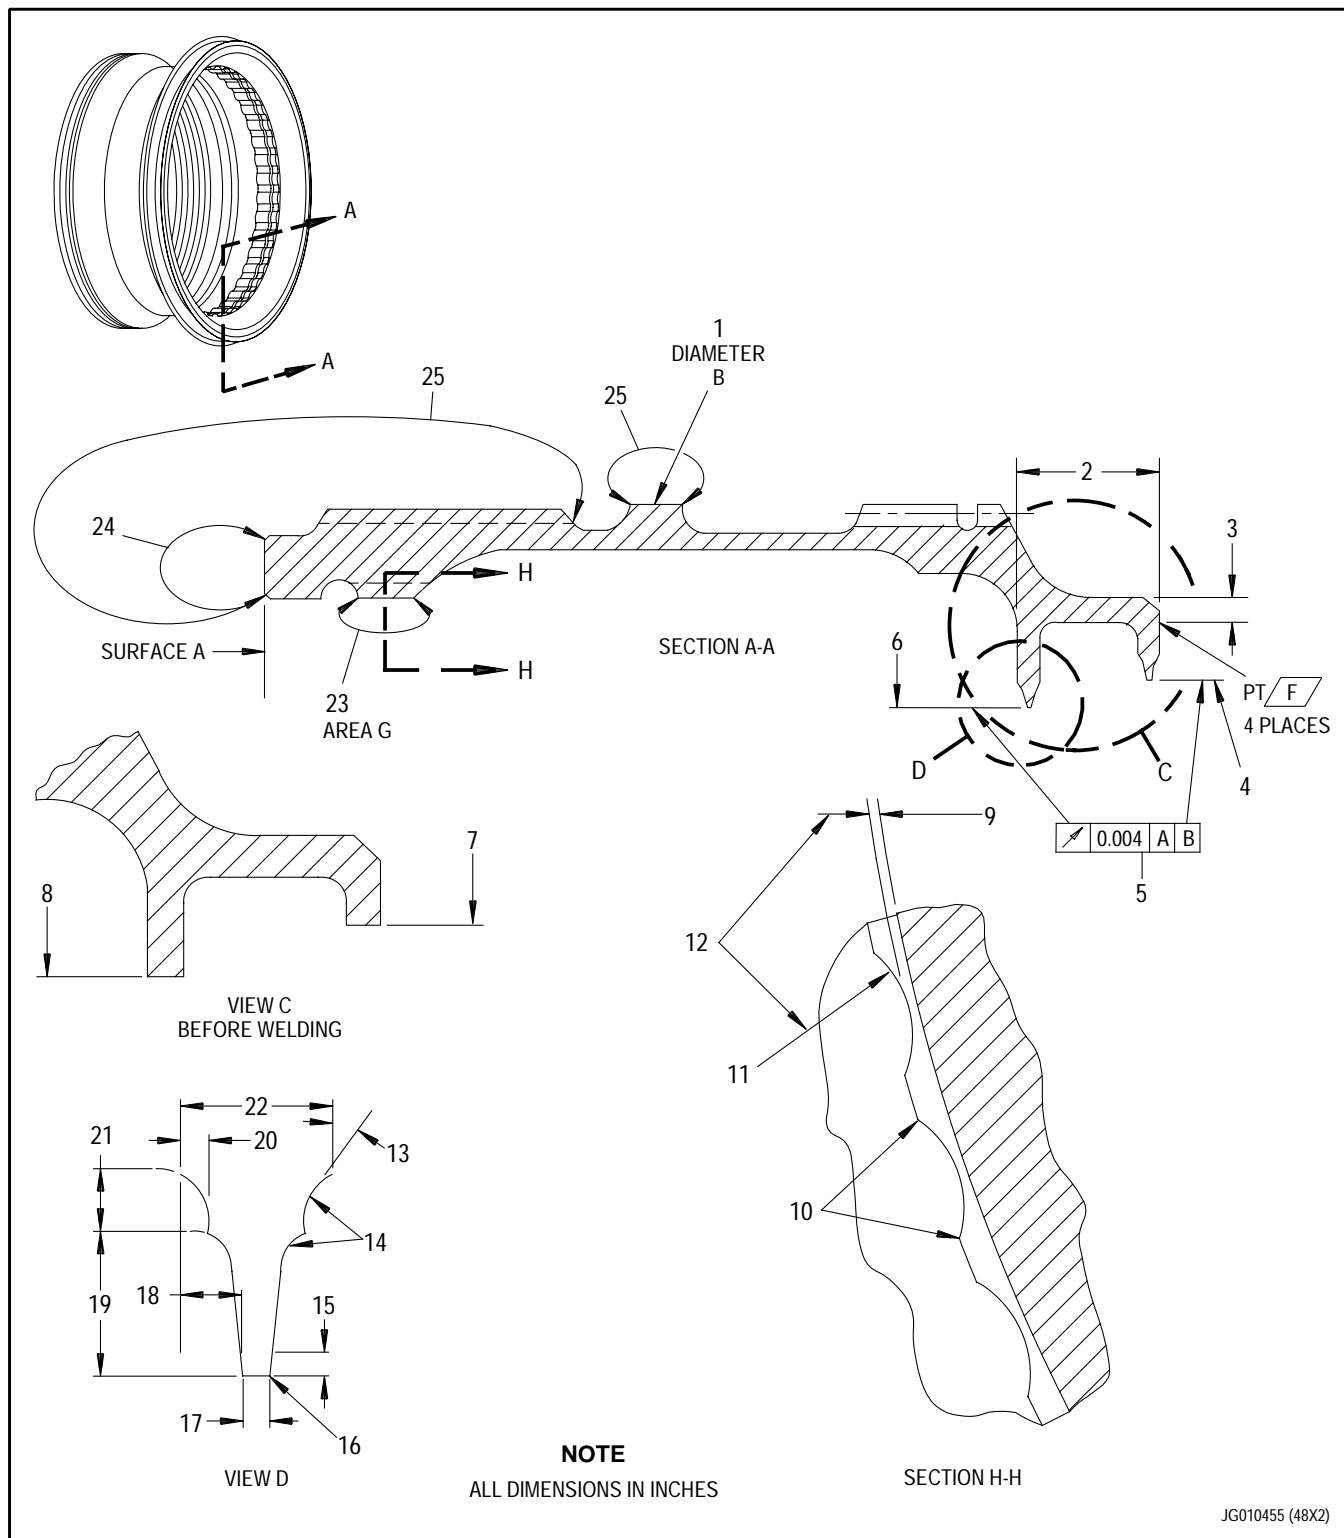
Rear Compressor Driveshaft Nut - Knife-Edge Replacement
